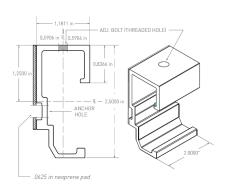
TAKTL FIBER-CEMENT PANEL SYSTEM (TYPICAL INSTALLATION DETAILS)
